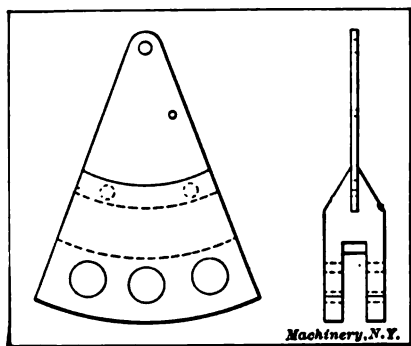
Die-cast Weight with Inserted Sheet-steel Punching
